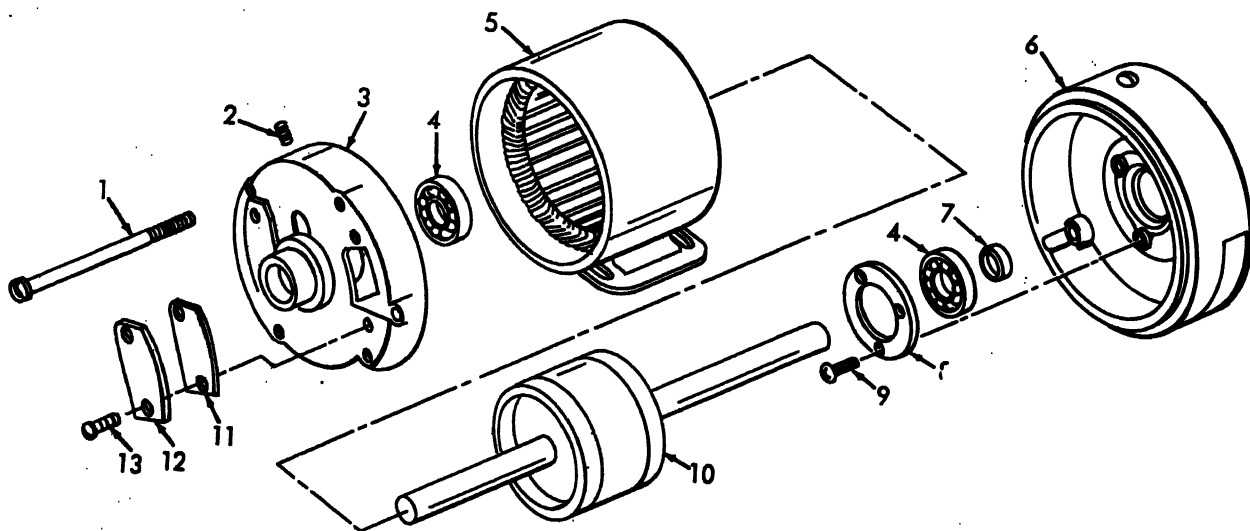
BLOWER MOTOR ASSEMBLY AND DISASSEMBLY
